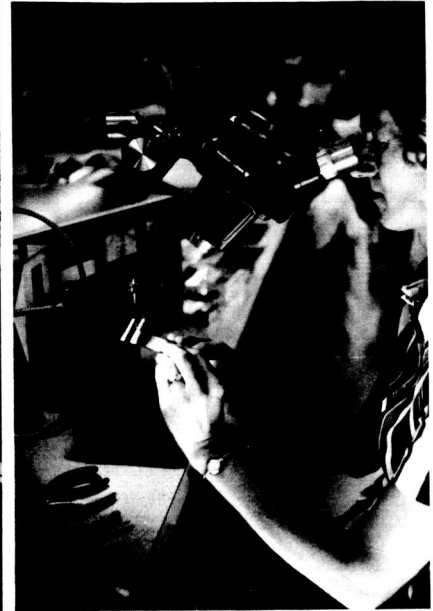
The normal connection to the wafer and pins is made directly to the laminated ribbon strips using the flex-weld process. In this photo, the operator is viewing the weld junction under the scope for centering. The weld tips are heated and forced through the teflon dielectric which is melted at the junction. Pressure is applied and when the proper joint resistance is obtained, the weld energy is released forming the junction.
